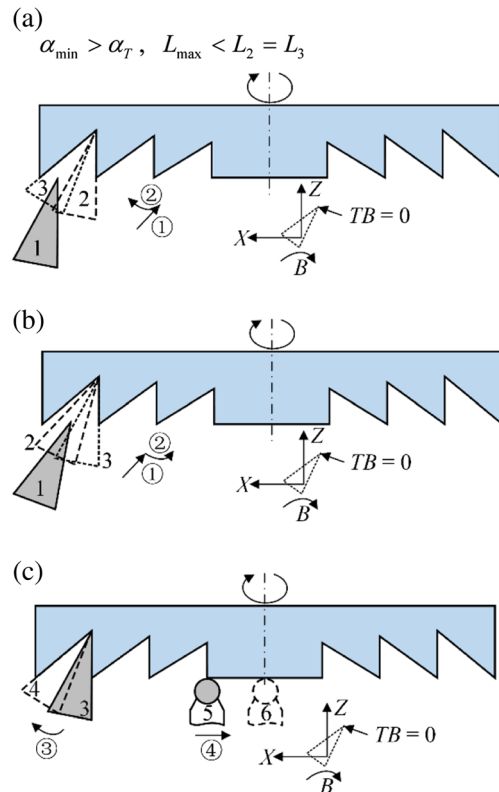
Cutting path planning: a vertical feeding, b machining the conical surface through the feeding with an inclined angle, and c machining the cylindrical surface and the center circle surface
